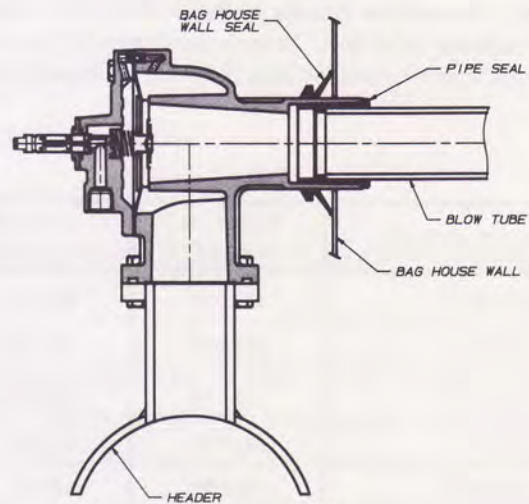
shows an installation where the header size, positioning, and wall bracing are designed so as to allow the valve outlet to pass through the baghouse wall. By keeping the hole clearance through the baghouse wall to a maximum of 3/16" [5mm] an effective seal is obtained using the flexible lip seal depicted. The positioning of this seal is on the outside of the baghouse wall when the baghouse is under negative pressure, and on the inside of the baghouse wall when the baghouse is under positive pressure. By this means, the pressure differential across the baghouse wall helps to maintain the seal. The blowtube is pushed into the valve outlet where the dynamic seal does its job. The blowtube, of course, has to be anchored at the end remote from the valve.
